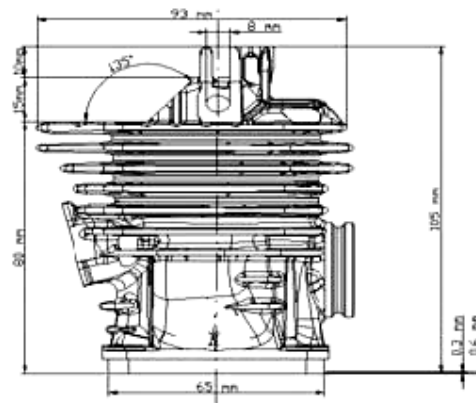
Modified engine cylinder for the air-assisted DI mounting* [1]
